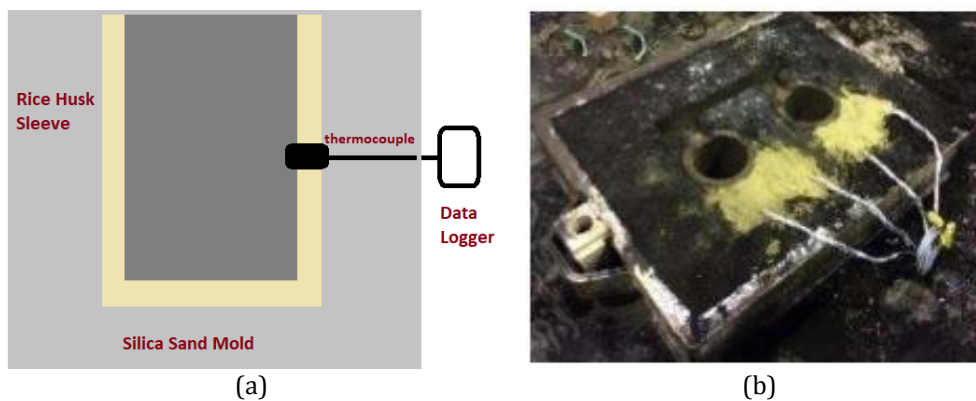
The layout for temperature measurement: (a) cross-section view; (b) top view
